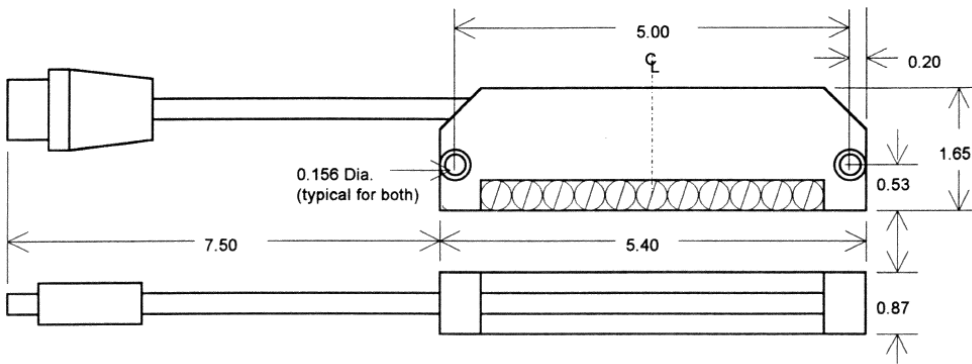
Dimensioned drawing of the Distribution Cable Terminal Block (dimensions shown in inches).
